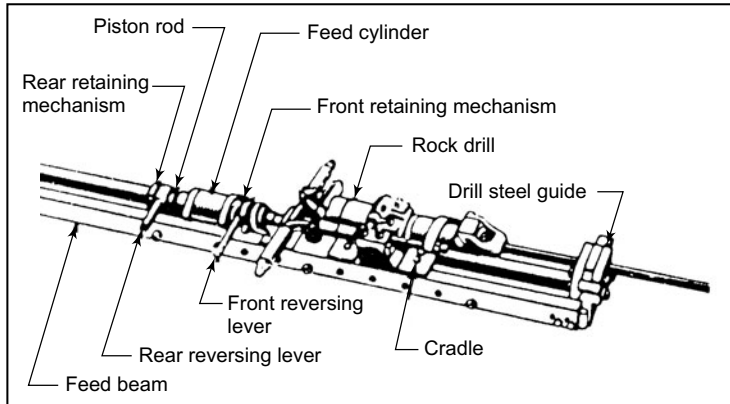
Details of an auto-feed used in horizontal boring in open wells in hard rock formations
